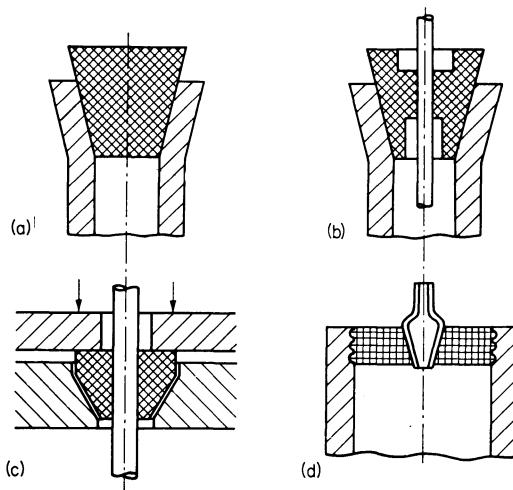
Conical gasket seals: (a) simple rubber plug; (b) rubber bung; (c) conical gasket sealed by compression flange; (d) conical glass sealed in metal pipe with Teflon gasket
